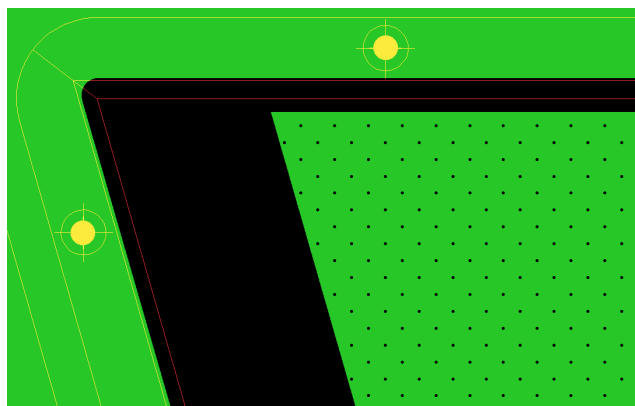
Top left side of the one MMSW PCB showing the pillar pattern.
